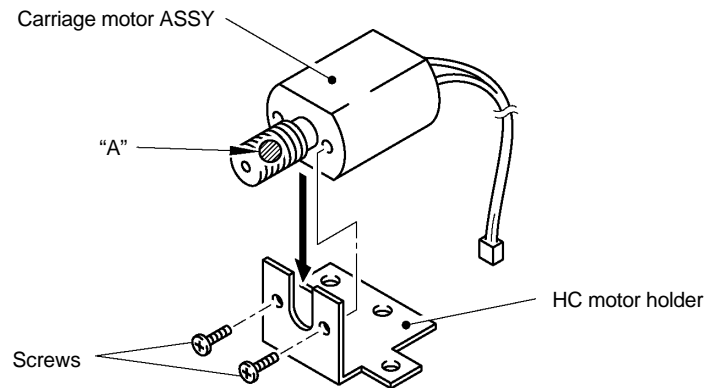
Reassembling the Carriage Motor ASSY (1)
